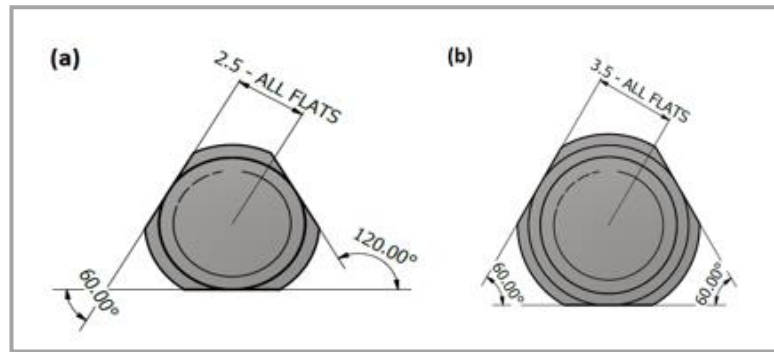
Floating Bobbin Tools pin profiles: (a) Tool 2 (b) Tool 1
